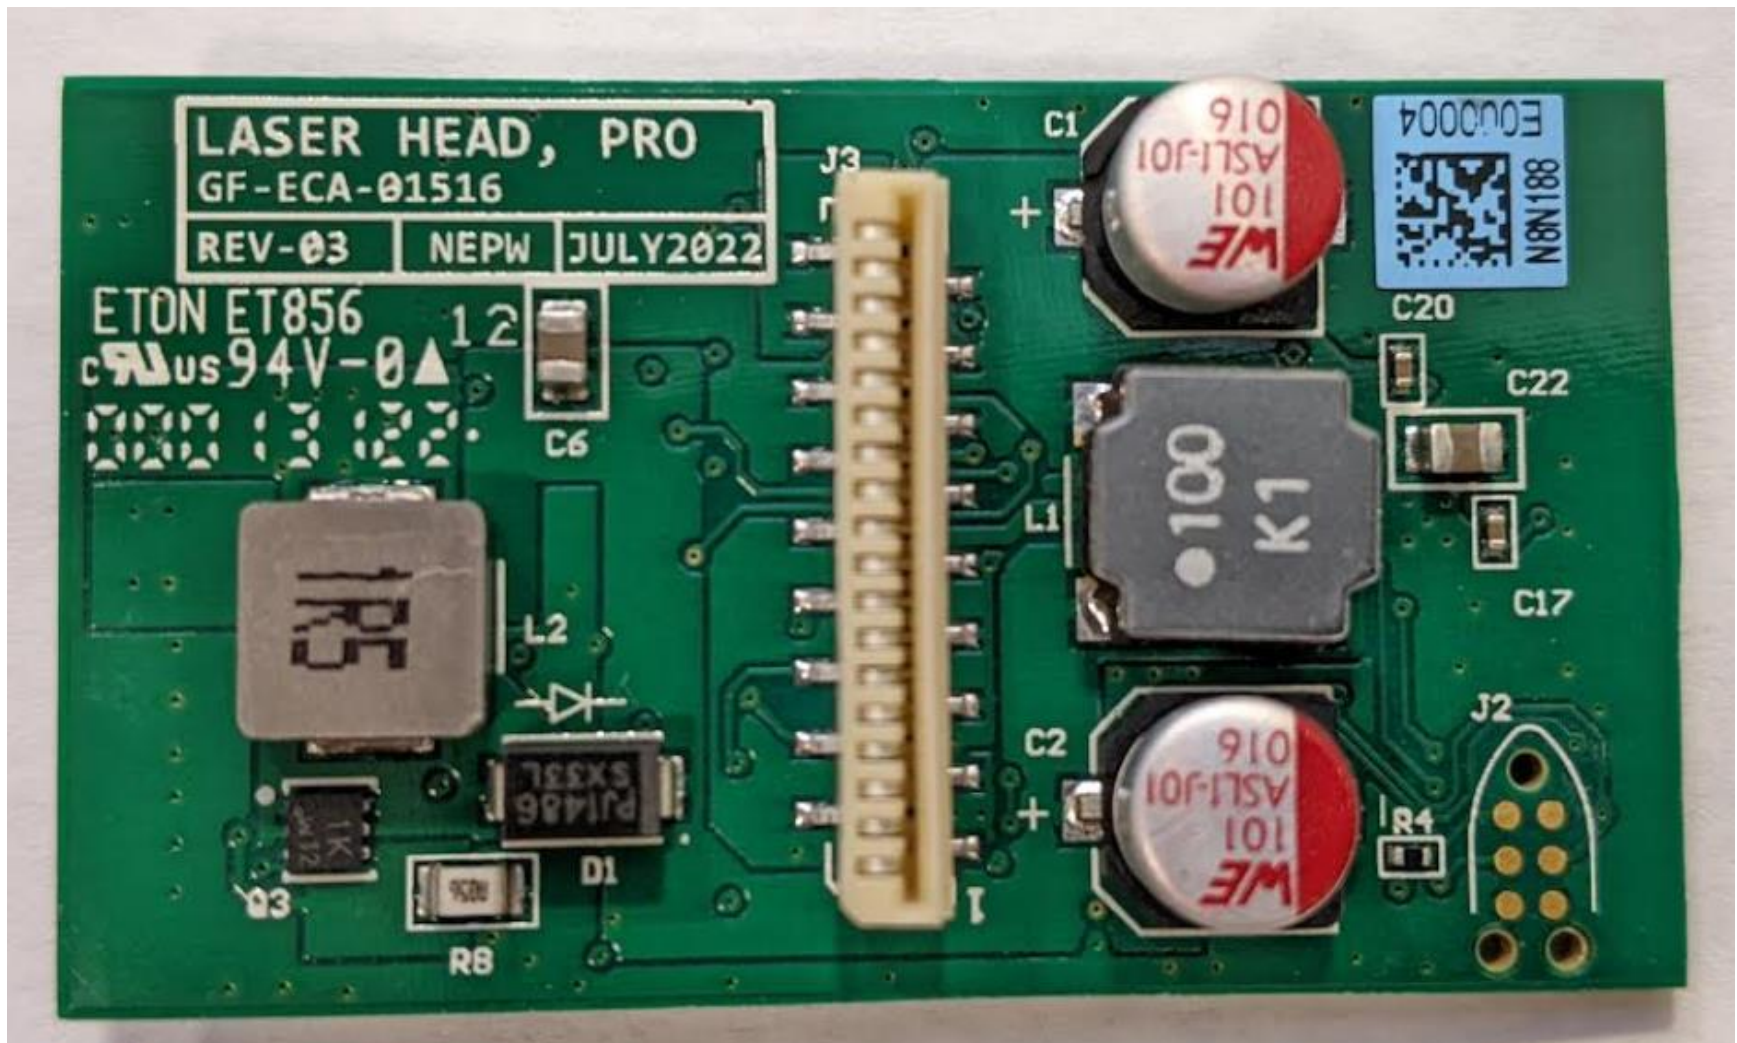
GF-PCA-00188- Rigid head PCBA- Top
